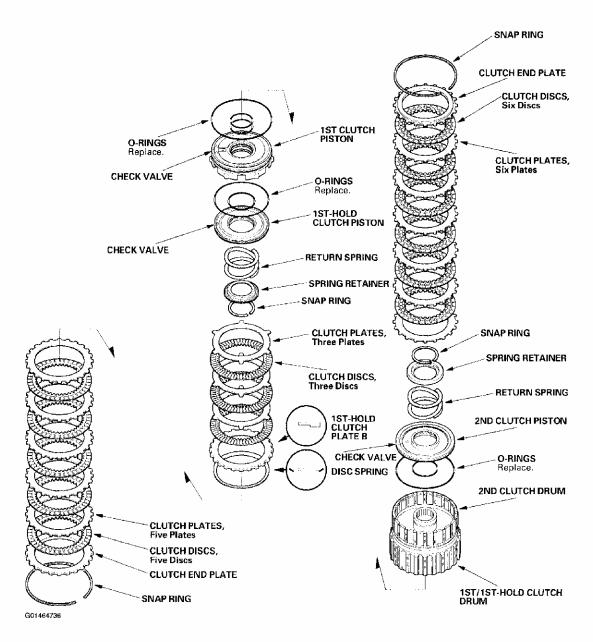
Exploded View Of 1st/1st-Hold/2nd Clutch Courtesy of AMERICAN HONDA MOTOR CO., INC.
